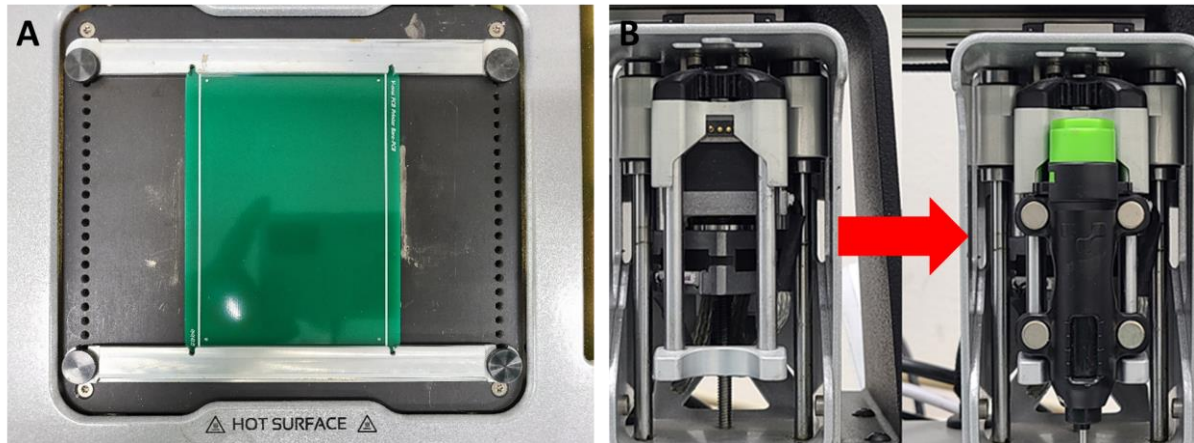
(A) The top view image of the PCB printer which holds the PCB board. (B) The front view image of the PCB printer which mounted the probe.
